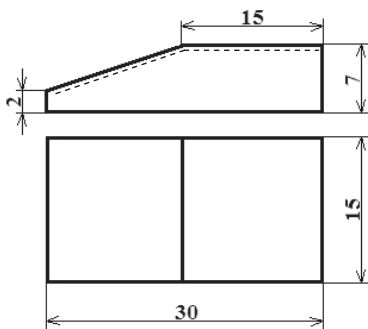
Shape and dimensions of the specimen for abrasive wear resistance test in grinding box
